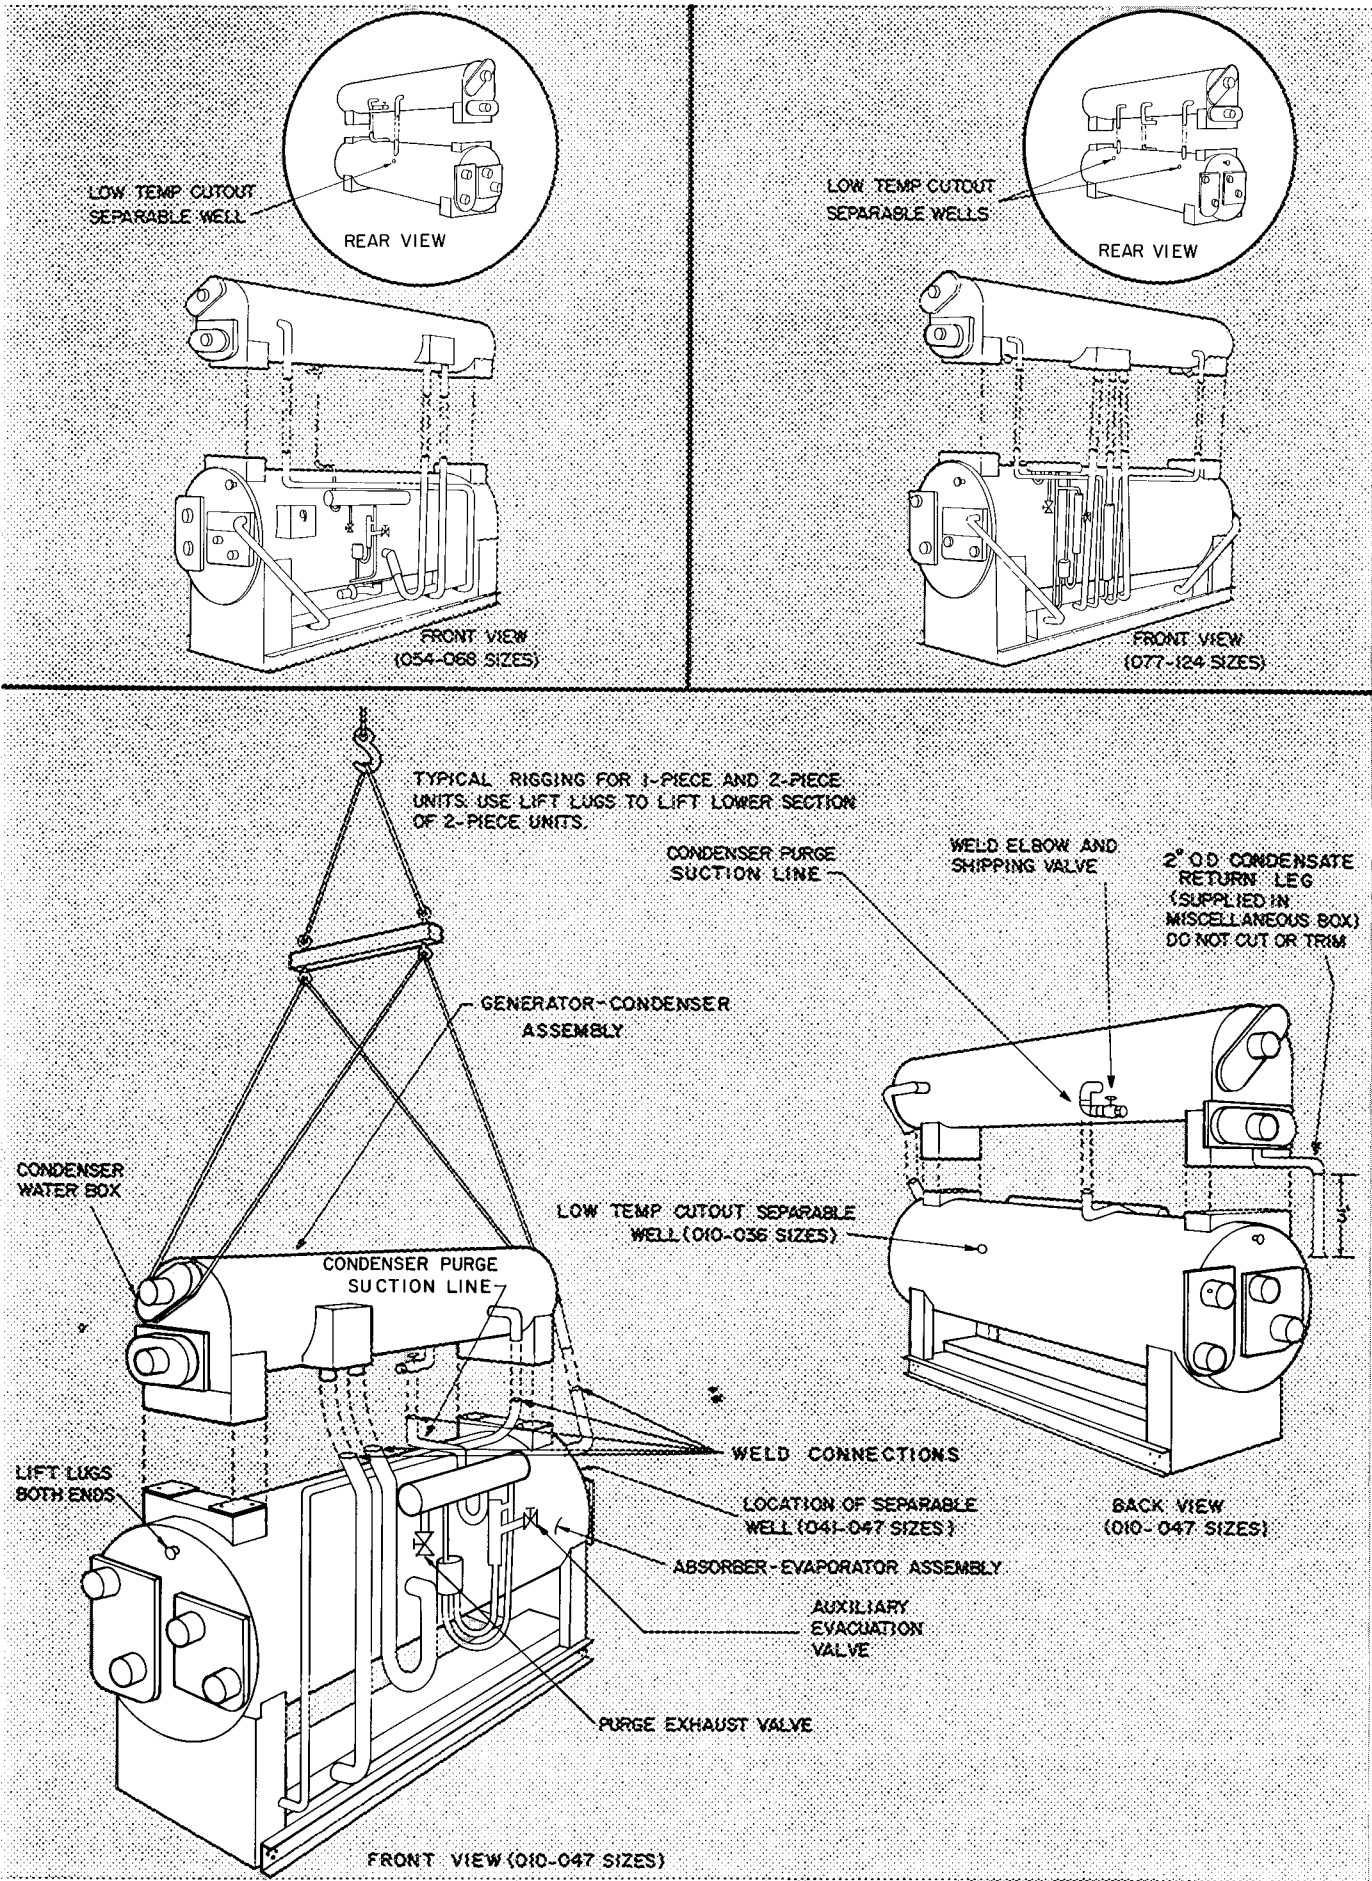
Piping Weld Connections and Typical Rigging
